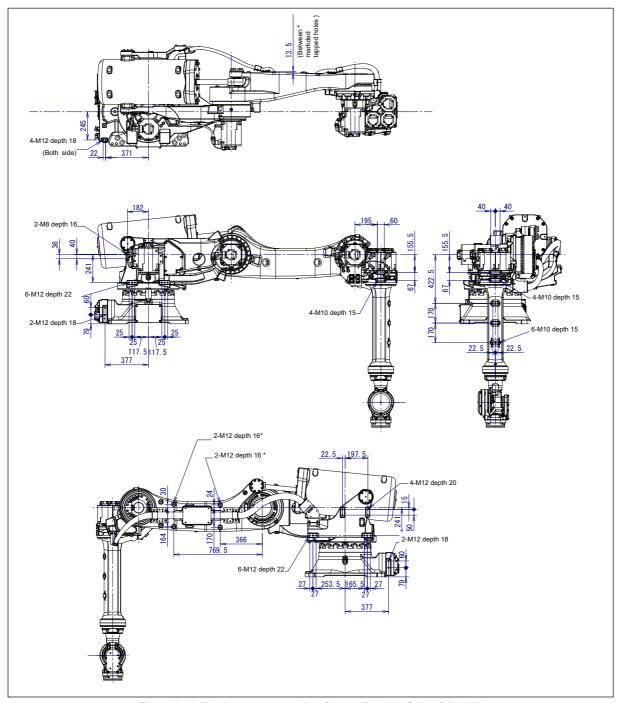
(c) Equipment mounting faces (R-2000iC/165R/210R)
